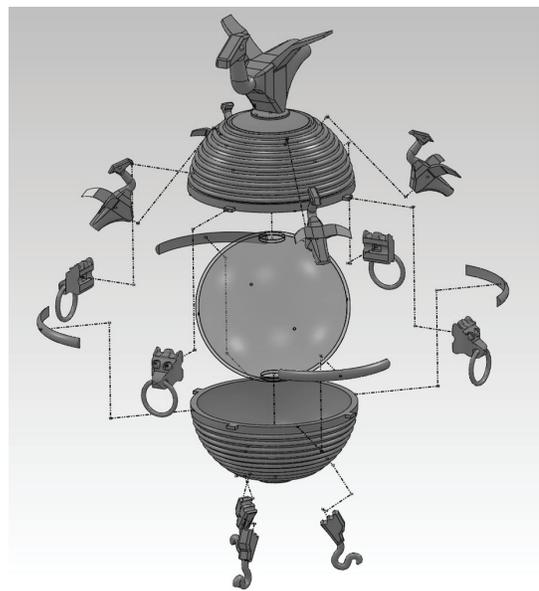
Metropolitan incense burner (fig. 12), exploded view, showing the separately cast parts. Illustration by Corey J. Tucker.
